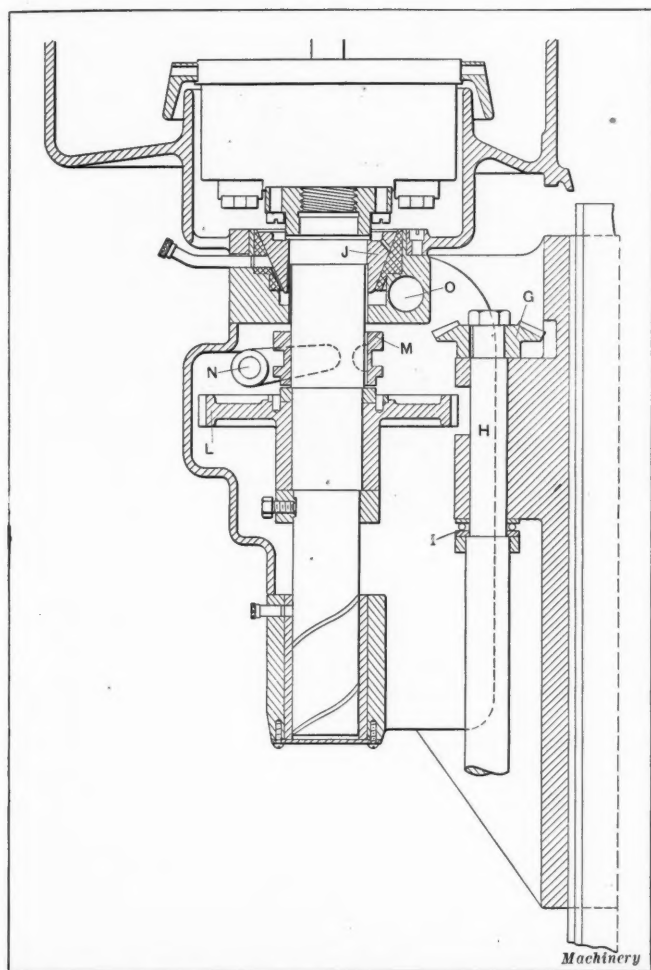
Cross-sectional View of Chuck Spindle and Operating Mechanism
